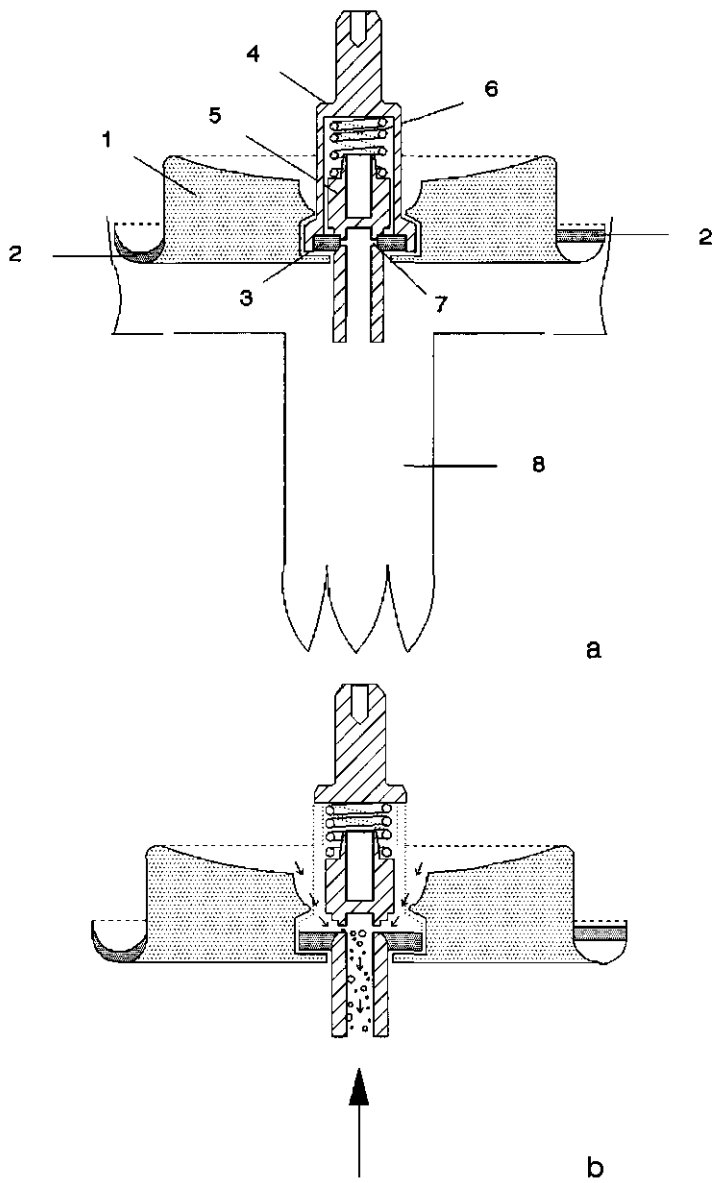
Schematic drawing of an aerosol valve (a) closed and (b) open. (1) valve holder, (2) outside gasket, (3) inside gasket, (4) valve casing, (5) valve cone, (6) spring, (7) hole, (8) spout.
